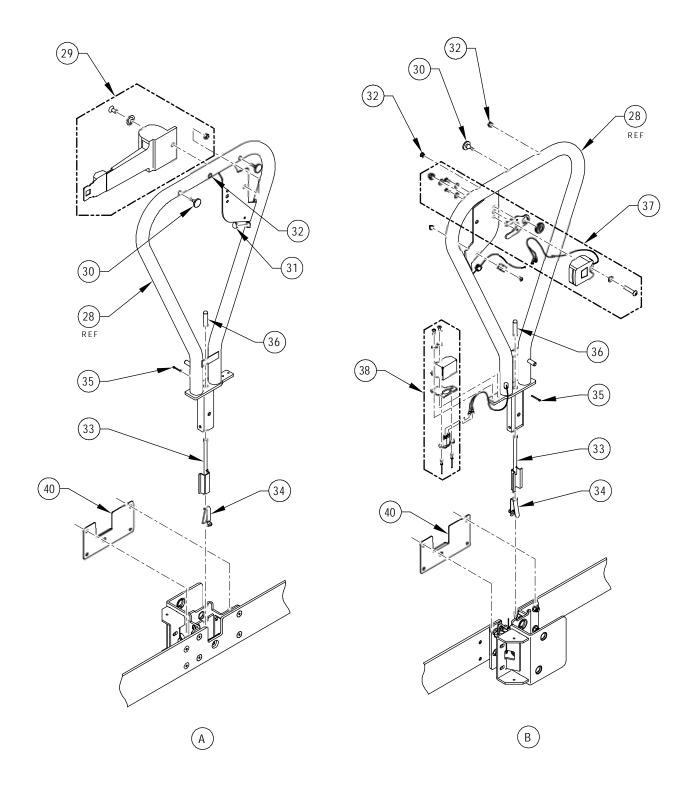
F10X-SERIES PLATFORM ASSEMBLY (SHEET 2 OF 2)
